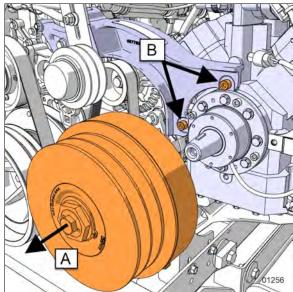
CLUTCH ASSEMBLY REMOVAL
